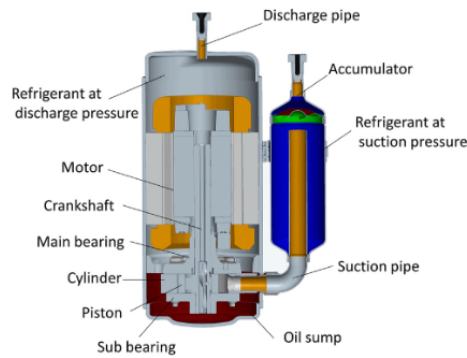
Cross-sectional view of a rolling piston compressor [42]
